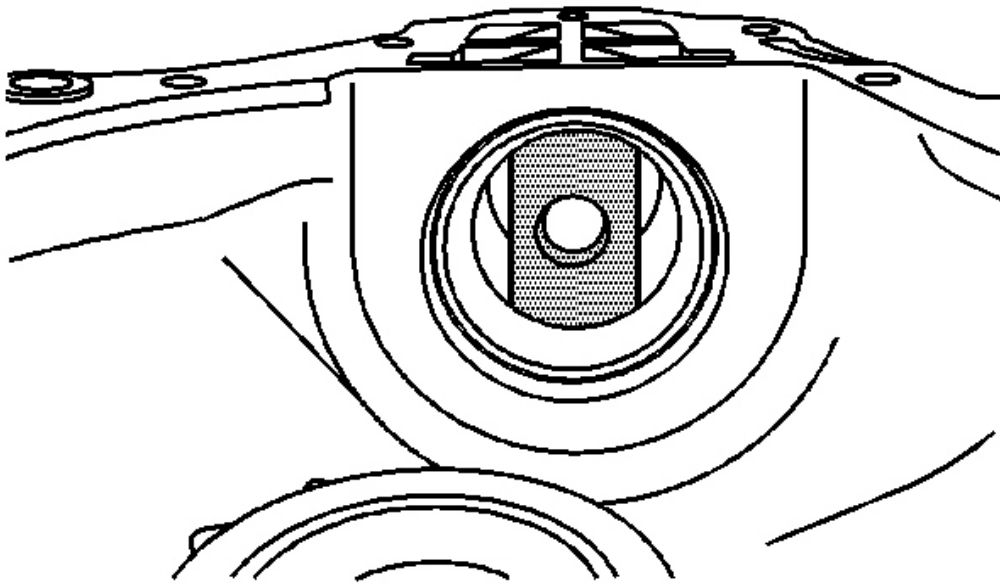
View of Special Tool J 45228-4 & Inner Pinion Bearing Cup
